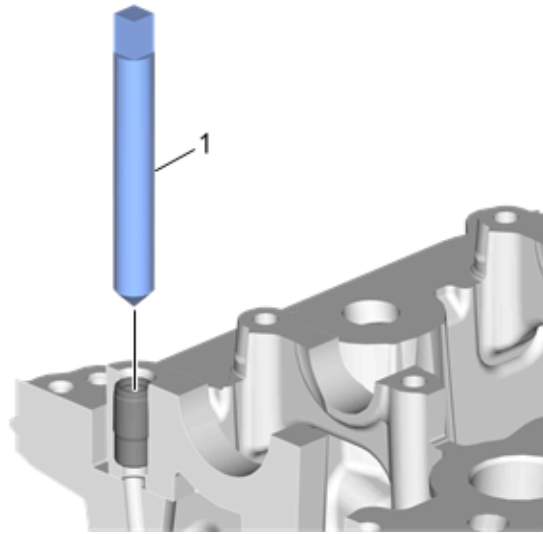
Tapping Drilled Out Portion Of Oil Manifold Check Valve
